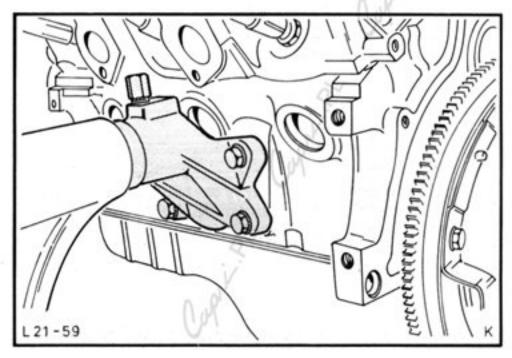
Fix engine on engine stand with engine mounting bracket 21-064.
